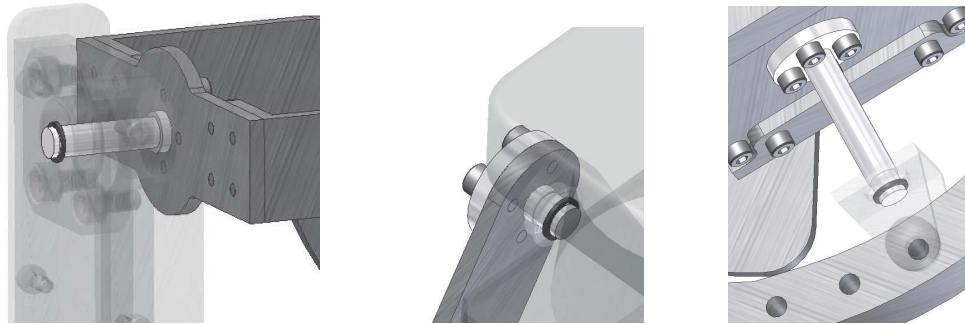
Assembly of retaining rings of rotation shafts.
